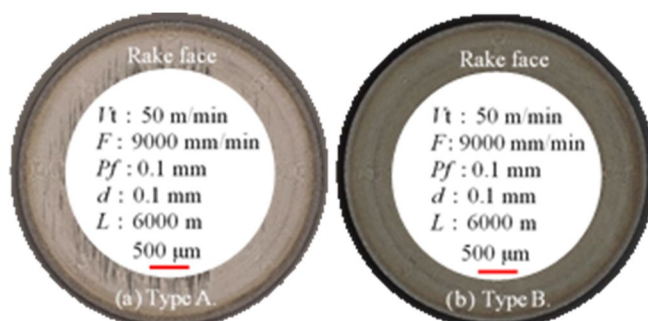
Photograph of the circumference cutting edge in each oil supply type.
